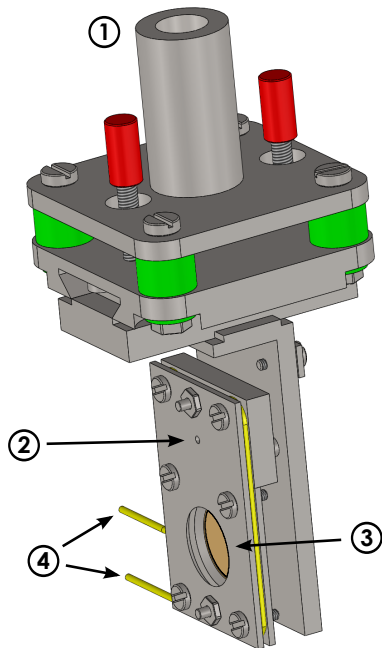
3D CAD drawing of the QCM holder version 2011:
